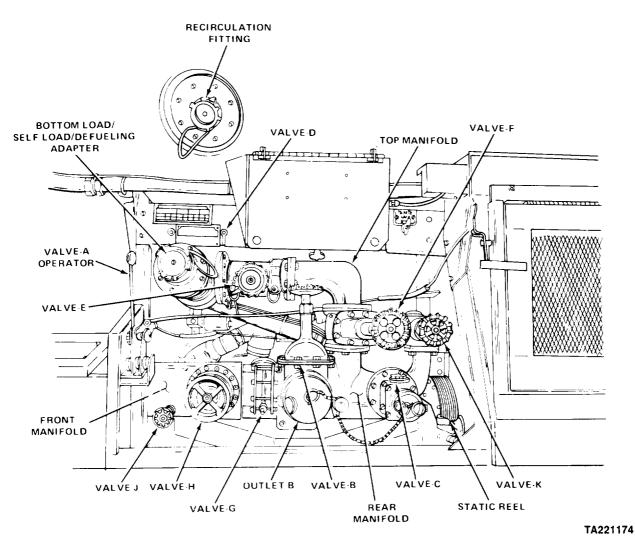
Piping Assembly and Valve Locations (M970 and M970A1).
